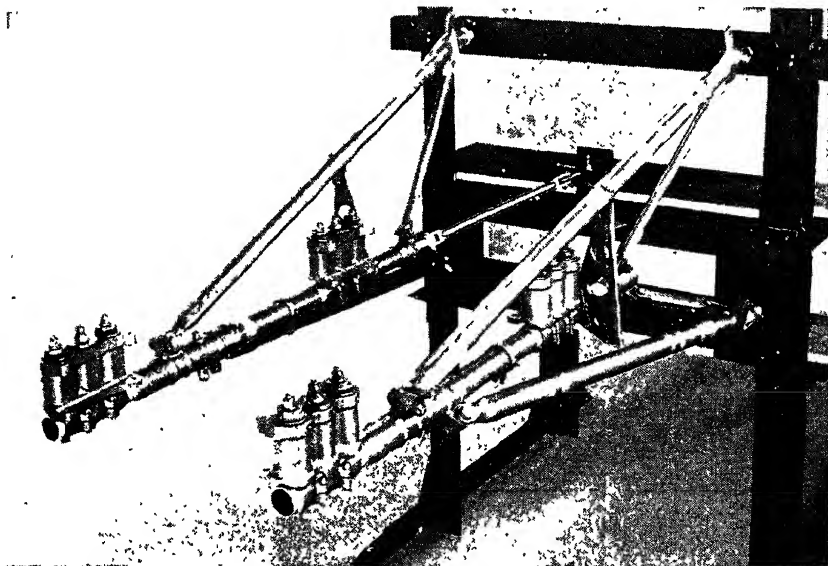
Engine mount for a Curtiss P-40 fighter showing tubular rubber mounting bushings. (*Lord Manufacturing Co.*)
